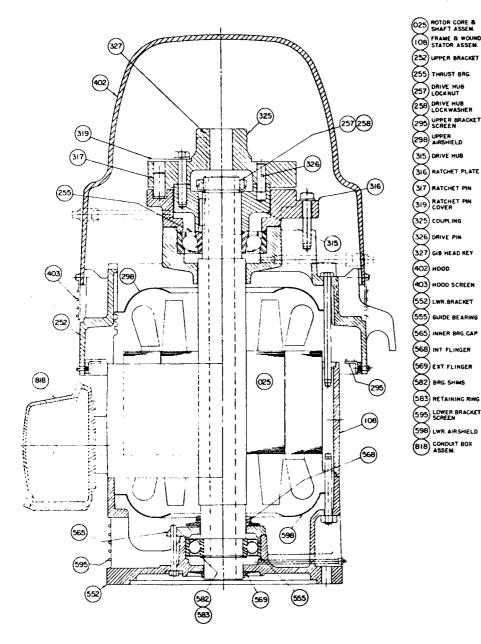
Arrangement of Parts, Vertical Hollow Shaft Dripproof Type T Life-Line Motors, Frames 210TP-280TP (Solid Shaft Motors use same Construction except Top Coupling and Ratchet Pins are Omitted.) Instruction Leaflet 2950-GL
